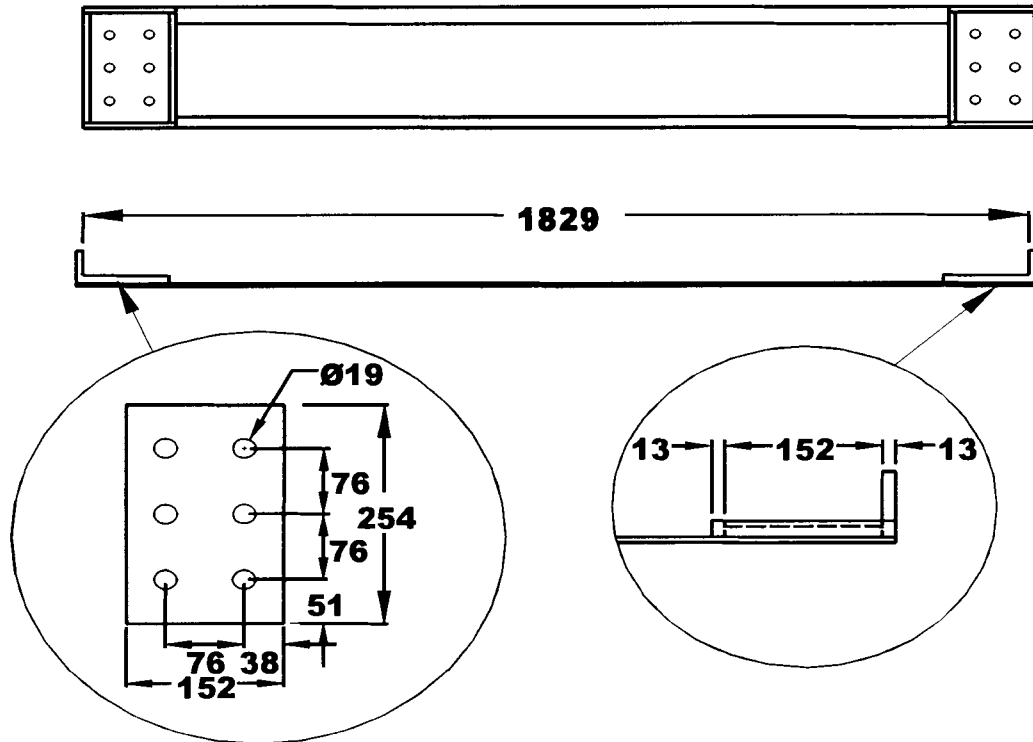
Specimen Alignment Fixture (all dimensions in mm)
